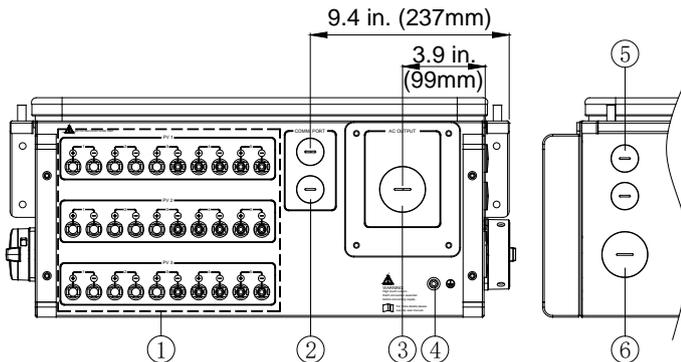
Internal Connection Points of Standard Wiring Box
